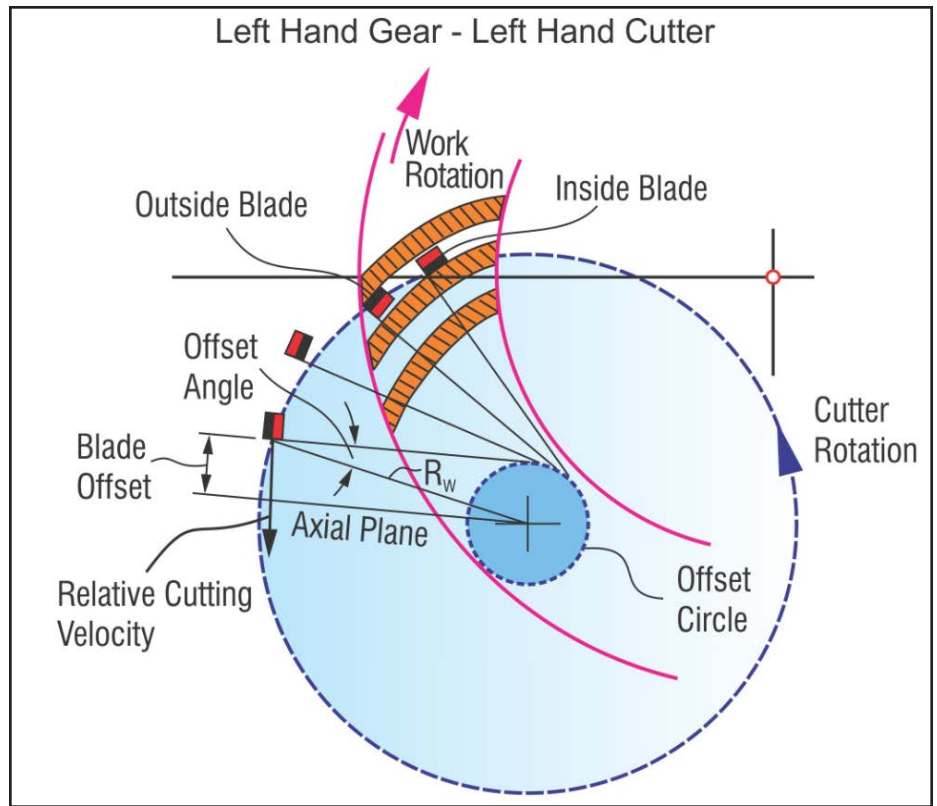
Face hobbing, left-hand gear with left-hand cutter head.
